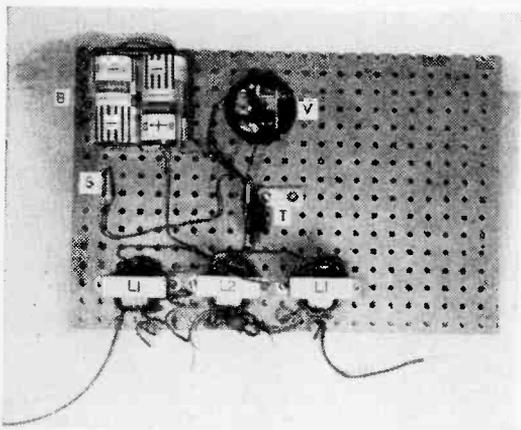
Follow the parts placement indicated in the photograph above. Switch is a Mueller Minigator clip.
